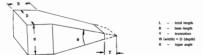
ESSENTIAL DIMENSIONS OF THE WEDGE
